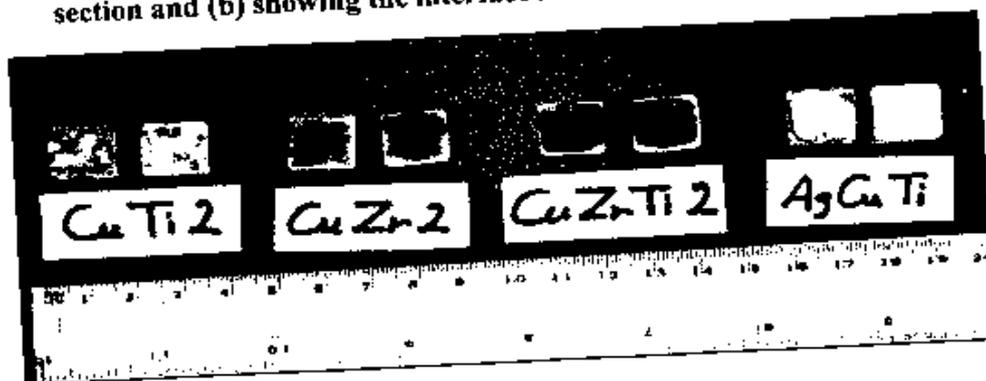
Photograph shows different types of single-butt joints, using different active filler-metal alloys. CuTi₂ and CuZr₂ brazed using true filler-metal, while CuZrTi₂ and Ag-Cu-Ti were brazed using paste filler-metals.
